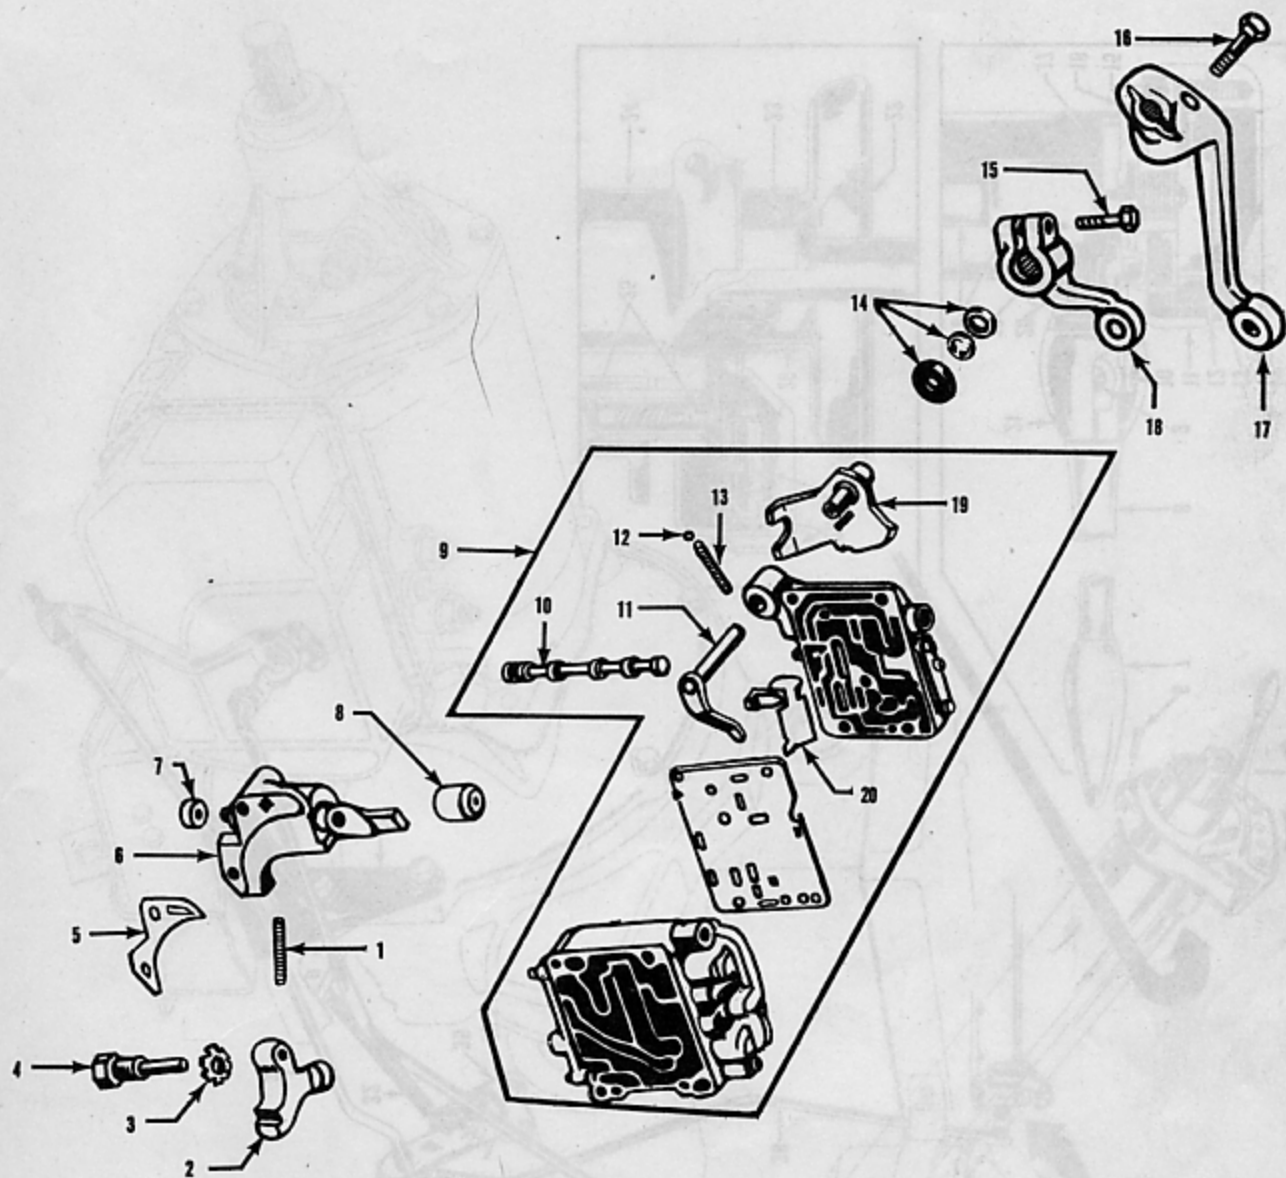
OIL CONTROL VALVE AND RELATED PARTS - HYDRA-MATIC
